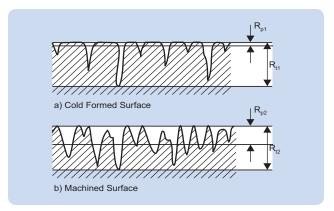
Surfaces Produced by Roller Burnishing (a) and by
